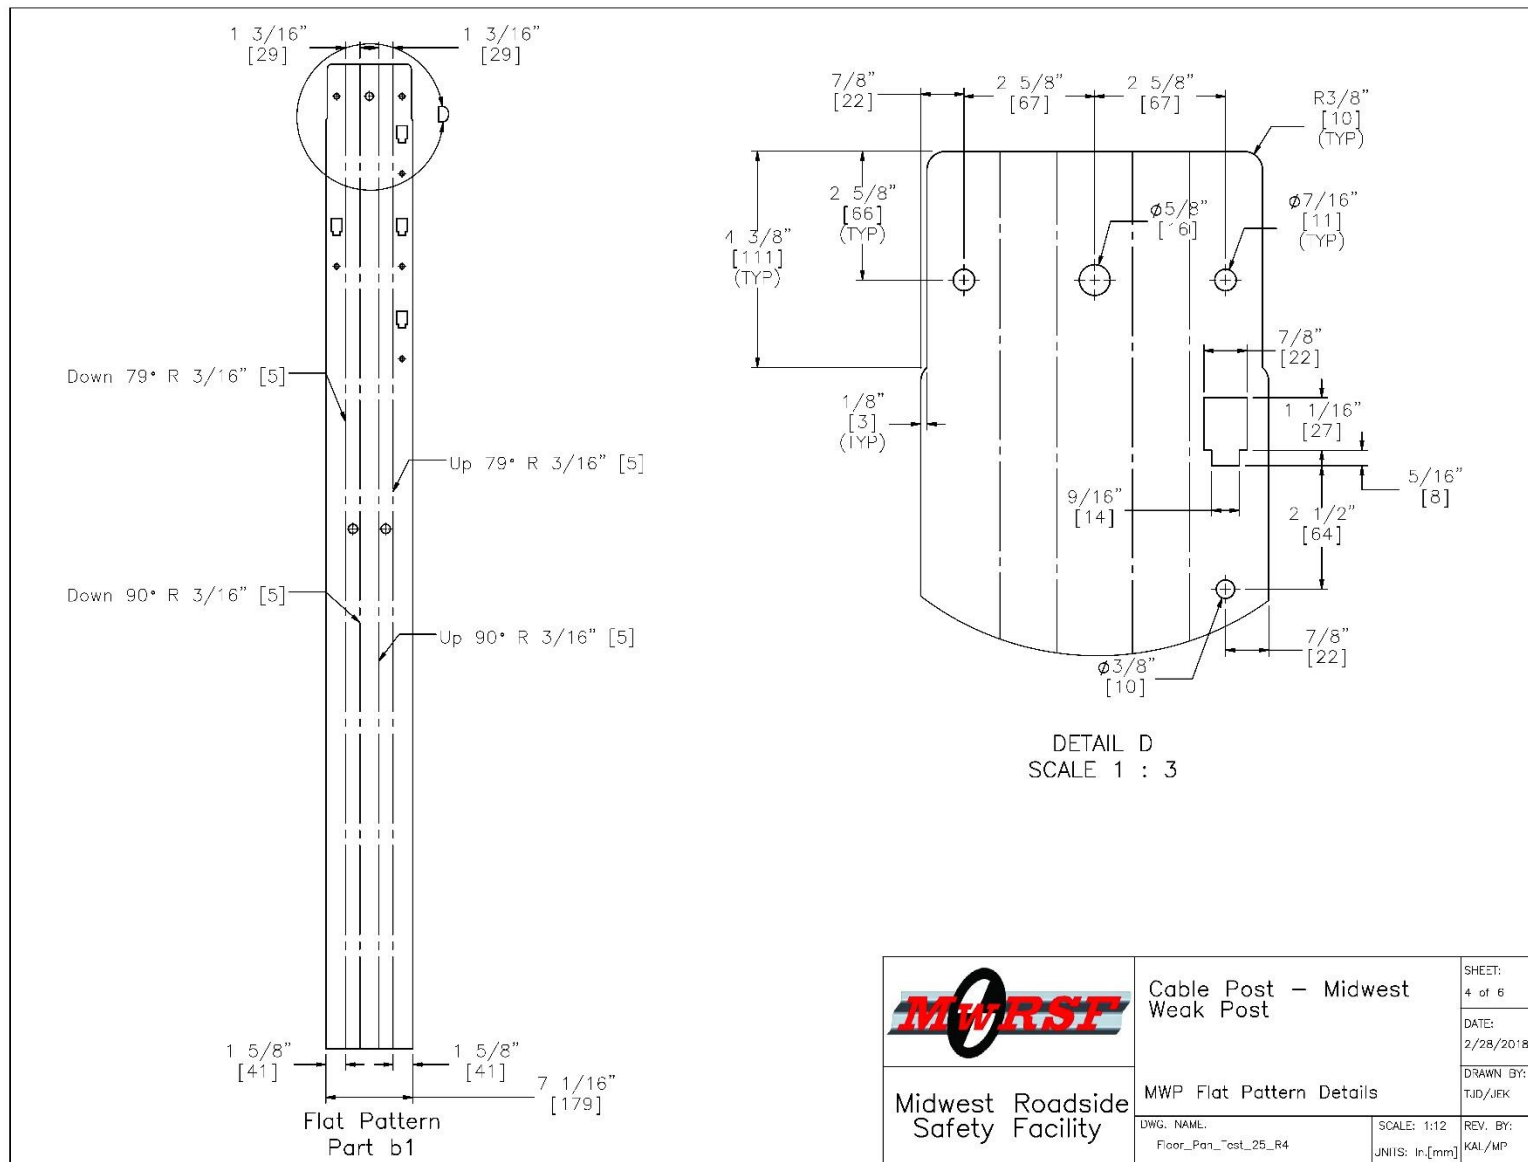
MWP Flat Pattern Details, Test No. MWFP-25
